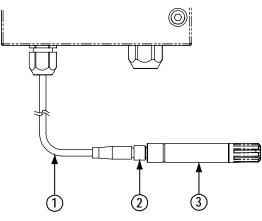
Removing the Humidity Probe (Remote Probe Model)
